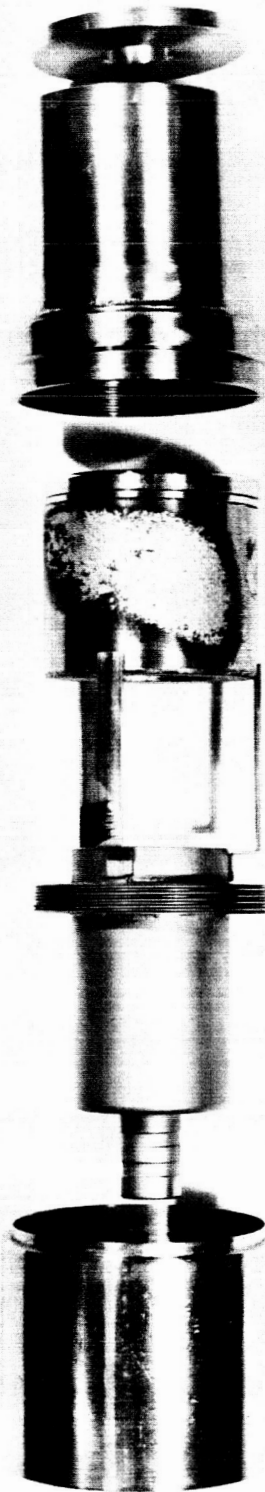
Parts of the Ion Pump Enclosure Prior to Assembly and Attachment to the Contact Capsule.
